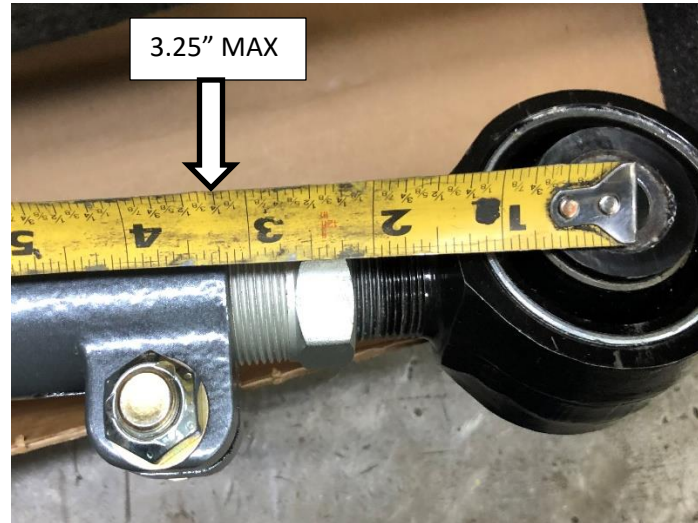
Adjusting the Rear Track Bar to Align the Axle Side Bolt.
